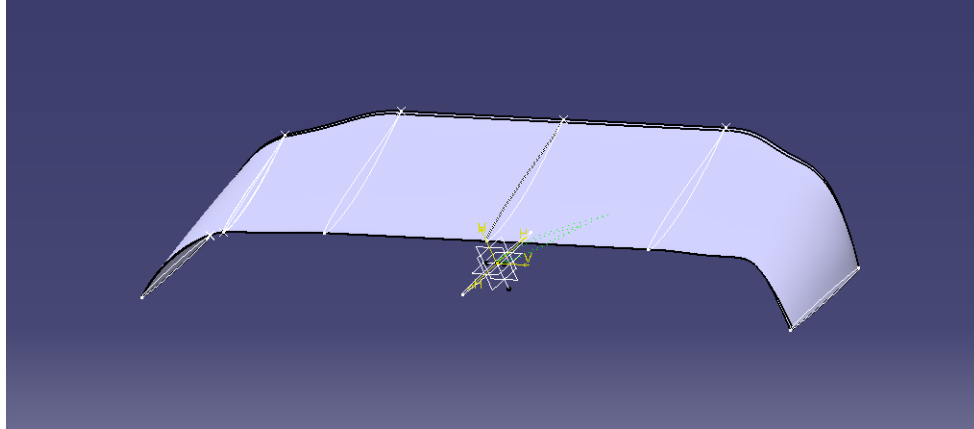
Design of the Spoiler using Cross-Sectional Solid
